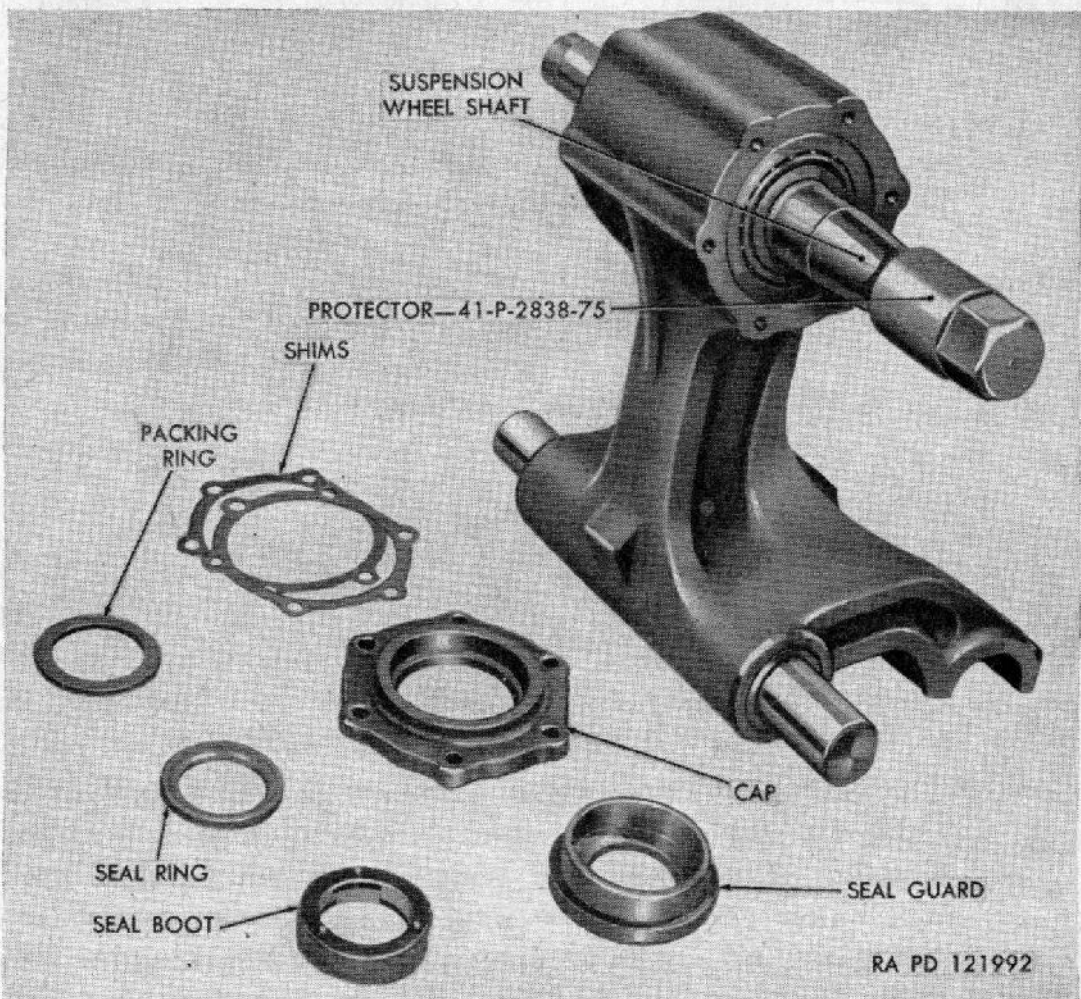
Shaft protector 41-P-2838-75 installed on suspension wheel shaft.
